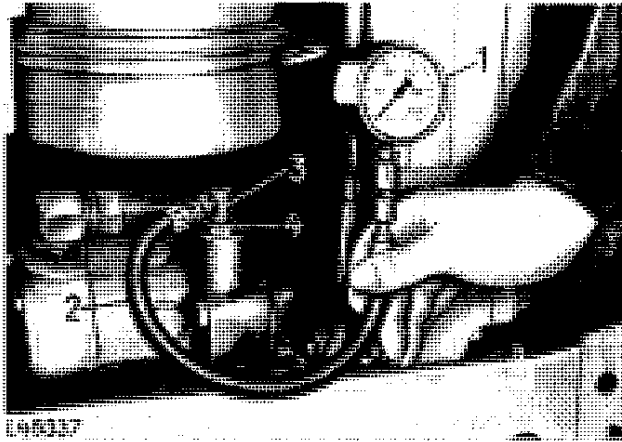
Pressure Gauge Connected to Hydraulic Pump
